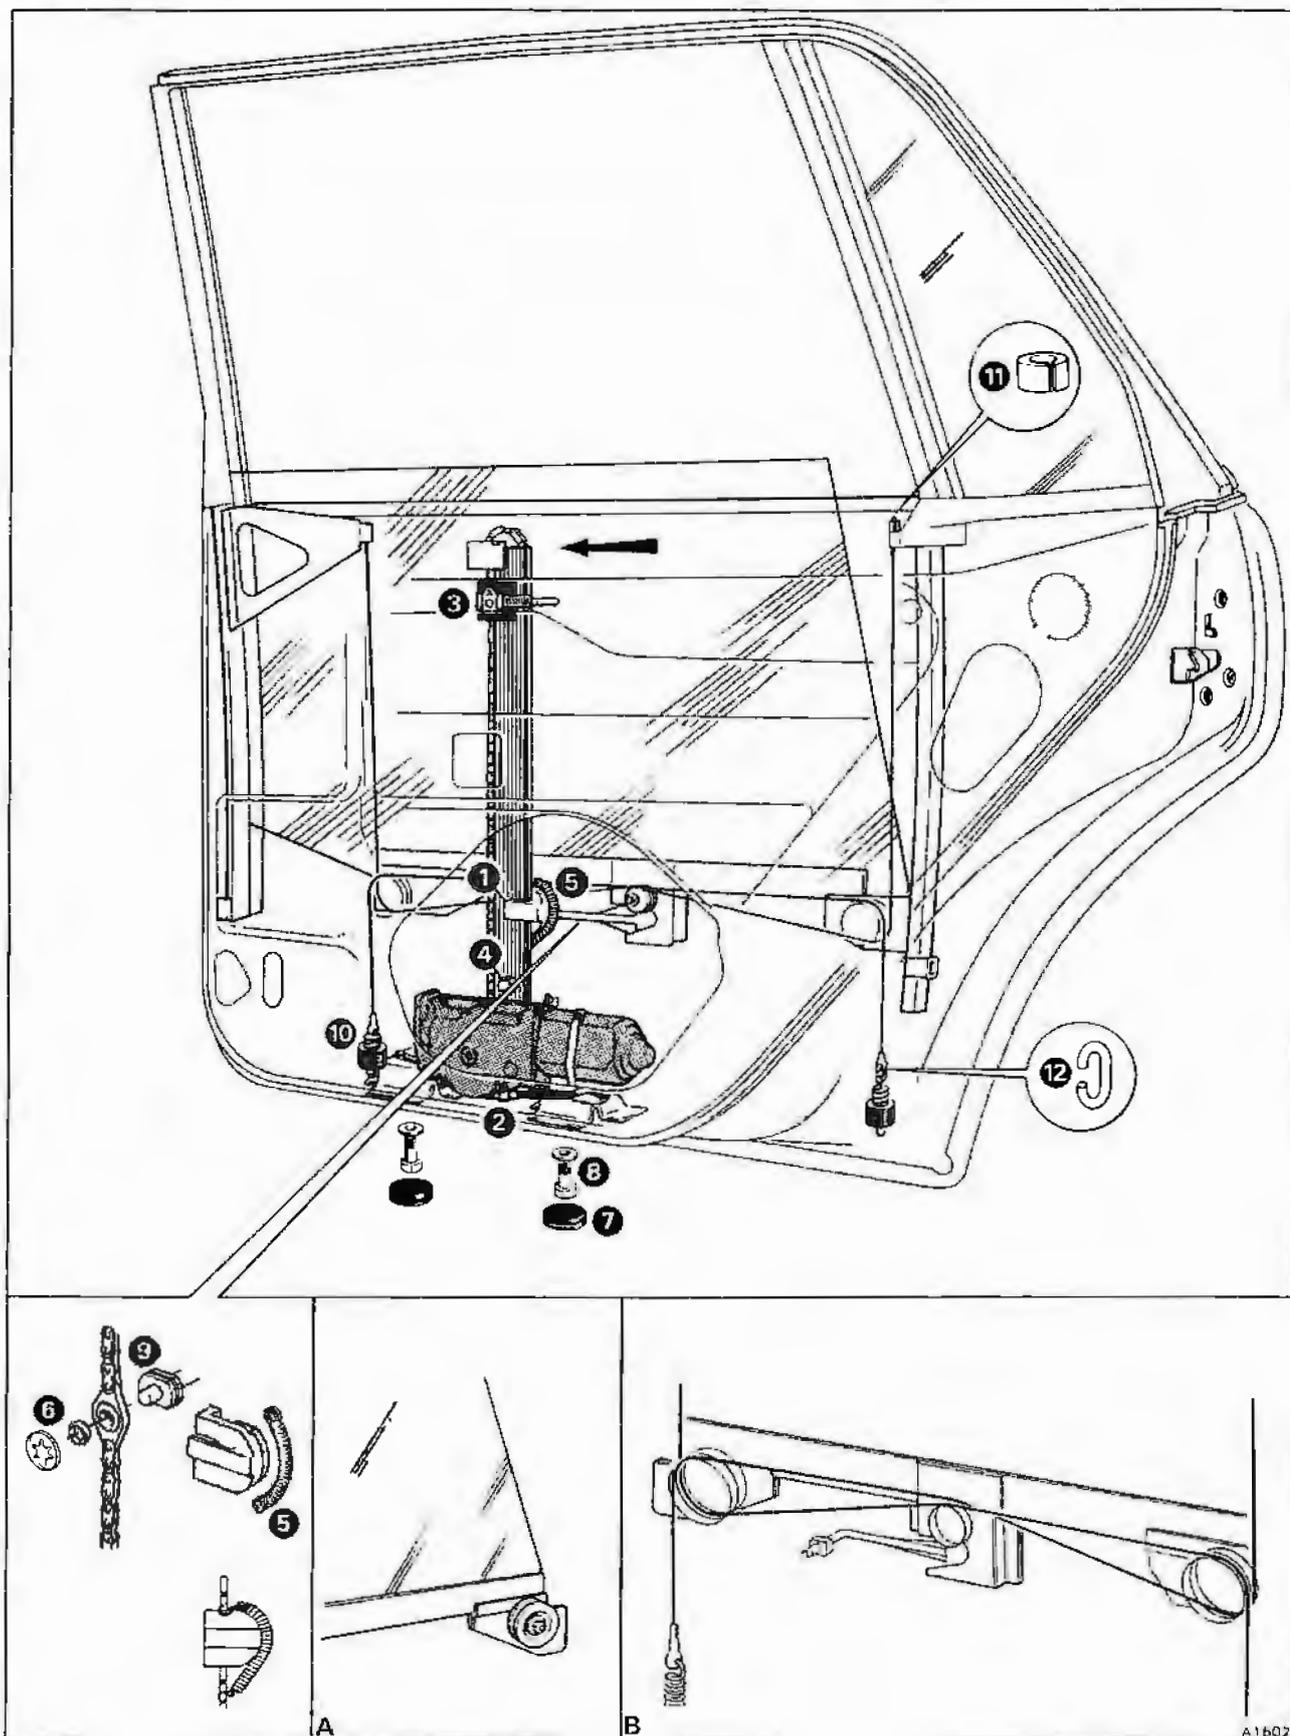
Window lift mechanism, door glass, and wire guidance assembly and fittings
